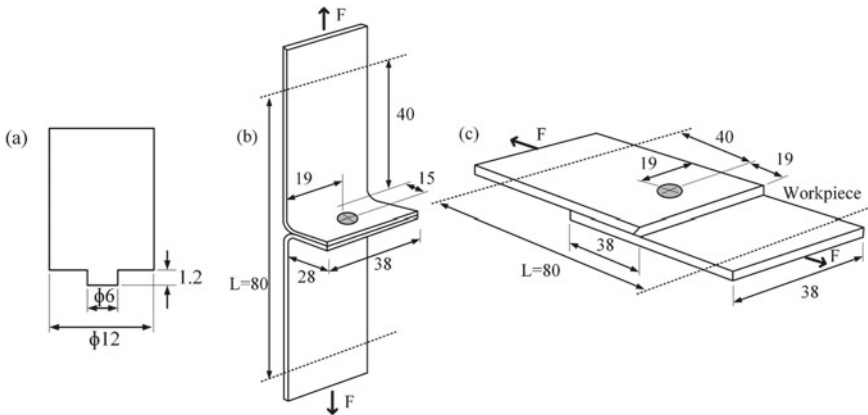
Schematic diagrams: a FSW tool with dimensions, b peel test sample, c lap shear test sample (all dimensions are in mm; L is the gripping length; F is the force applied by UTM)
